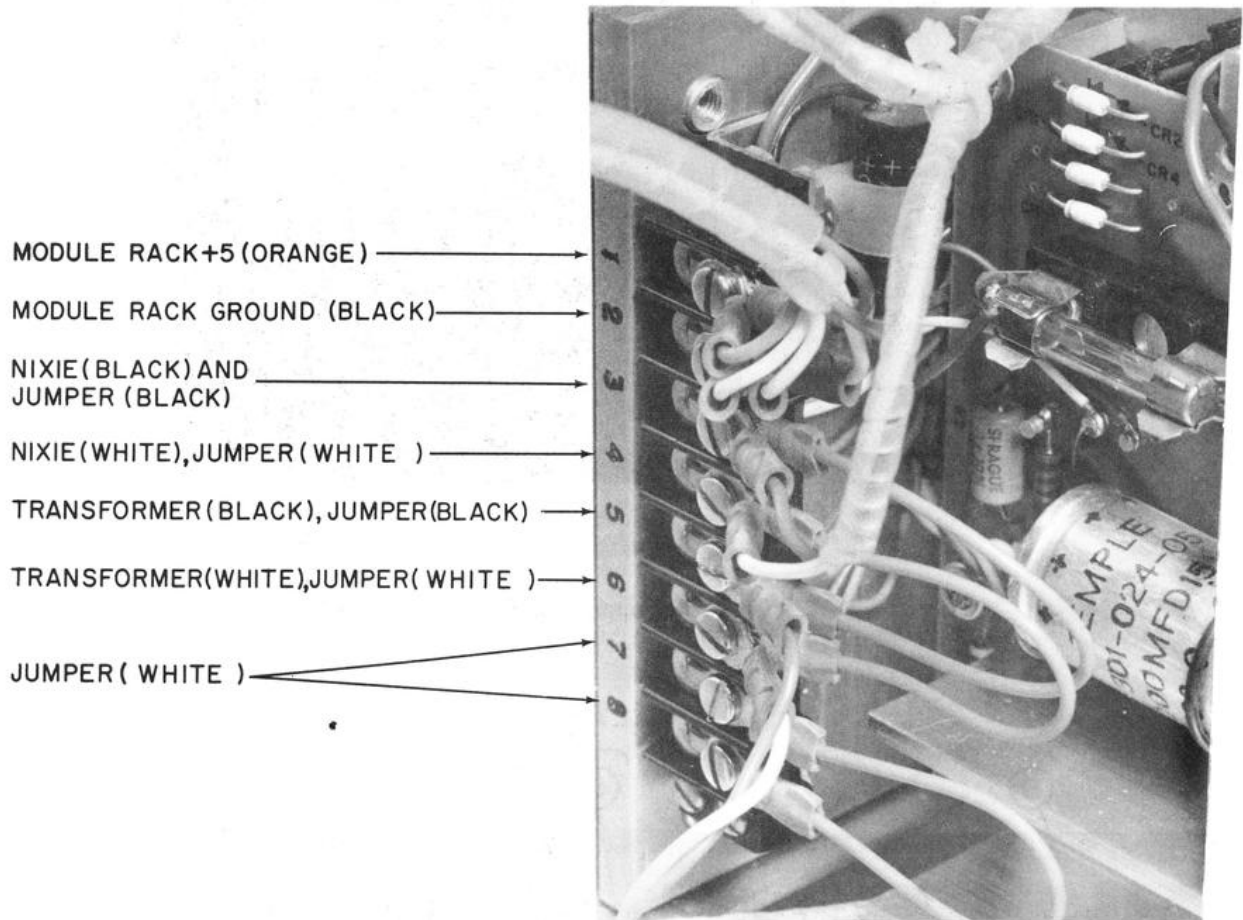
Power Supply – Terminal Board (TB) Wiring Guide
